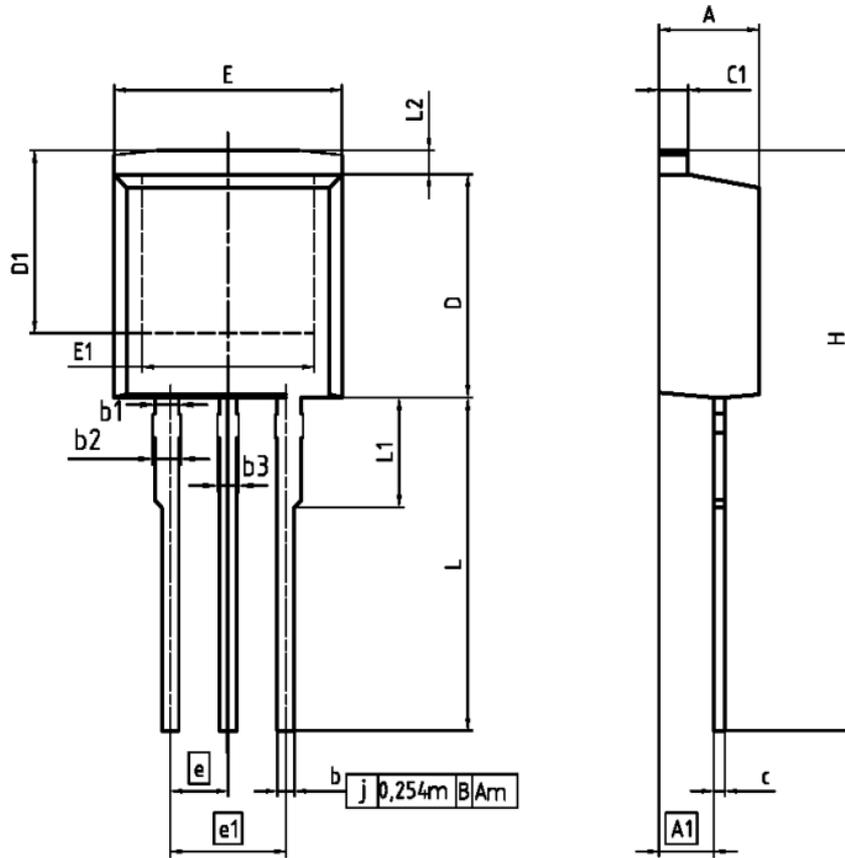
Outline PG-TO-220 FullPAK dimensions in mm
